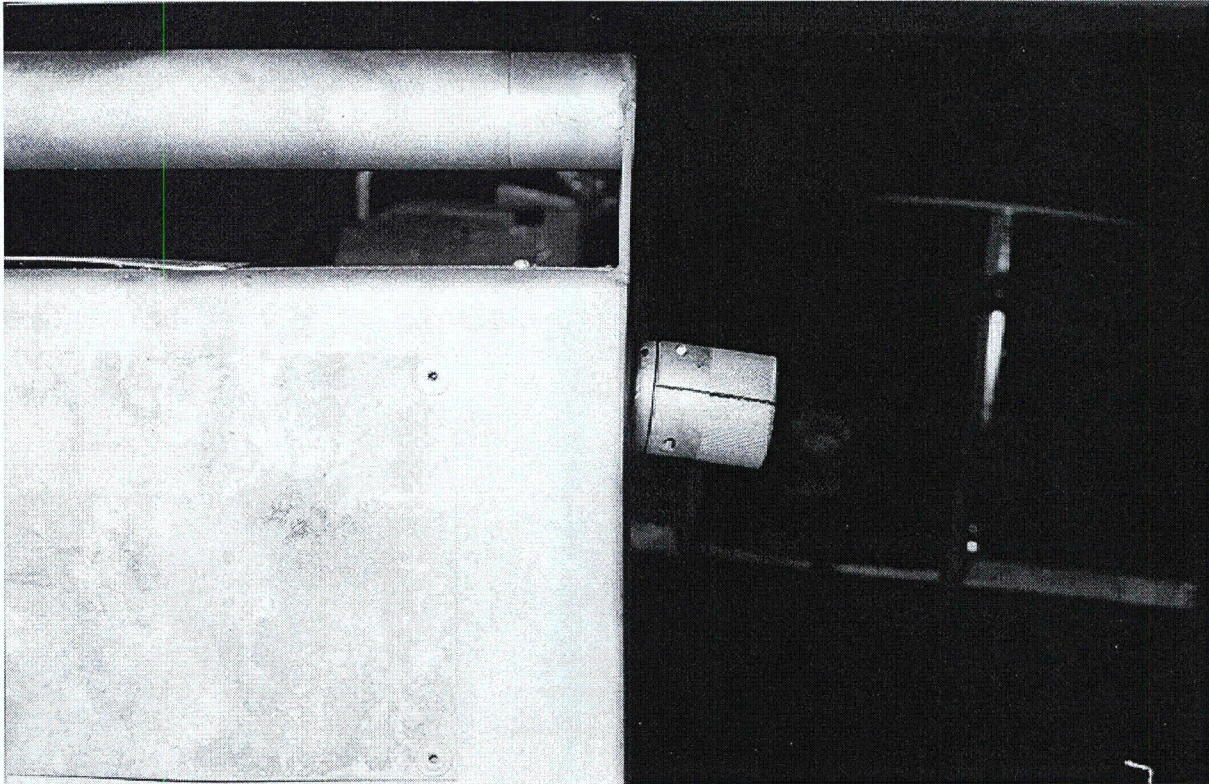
CTU-3 Post-Test Disassembly: Damaged Safety Plug
